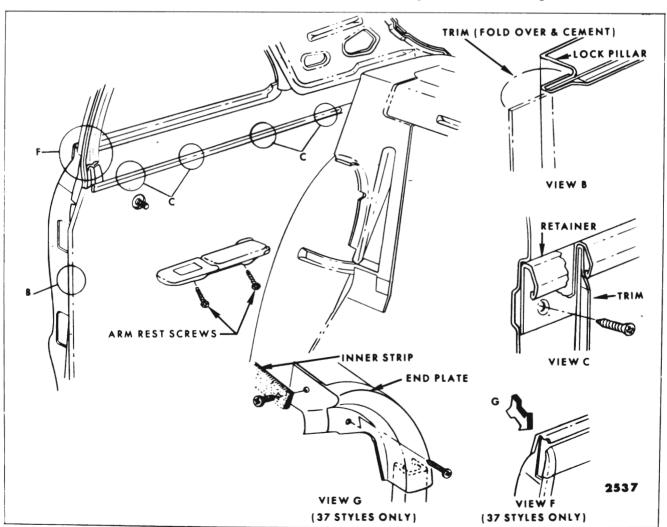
Rear Quarter Trim Assembly (Insert Type)
